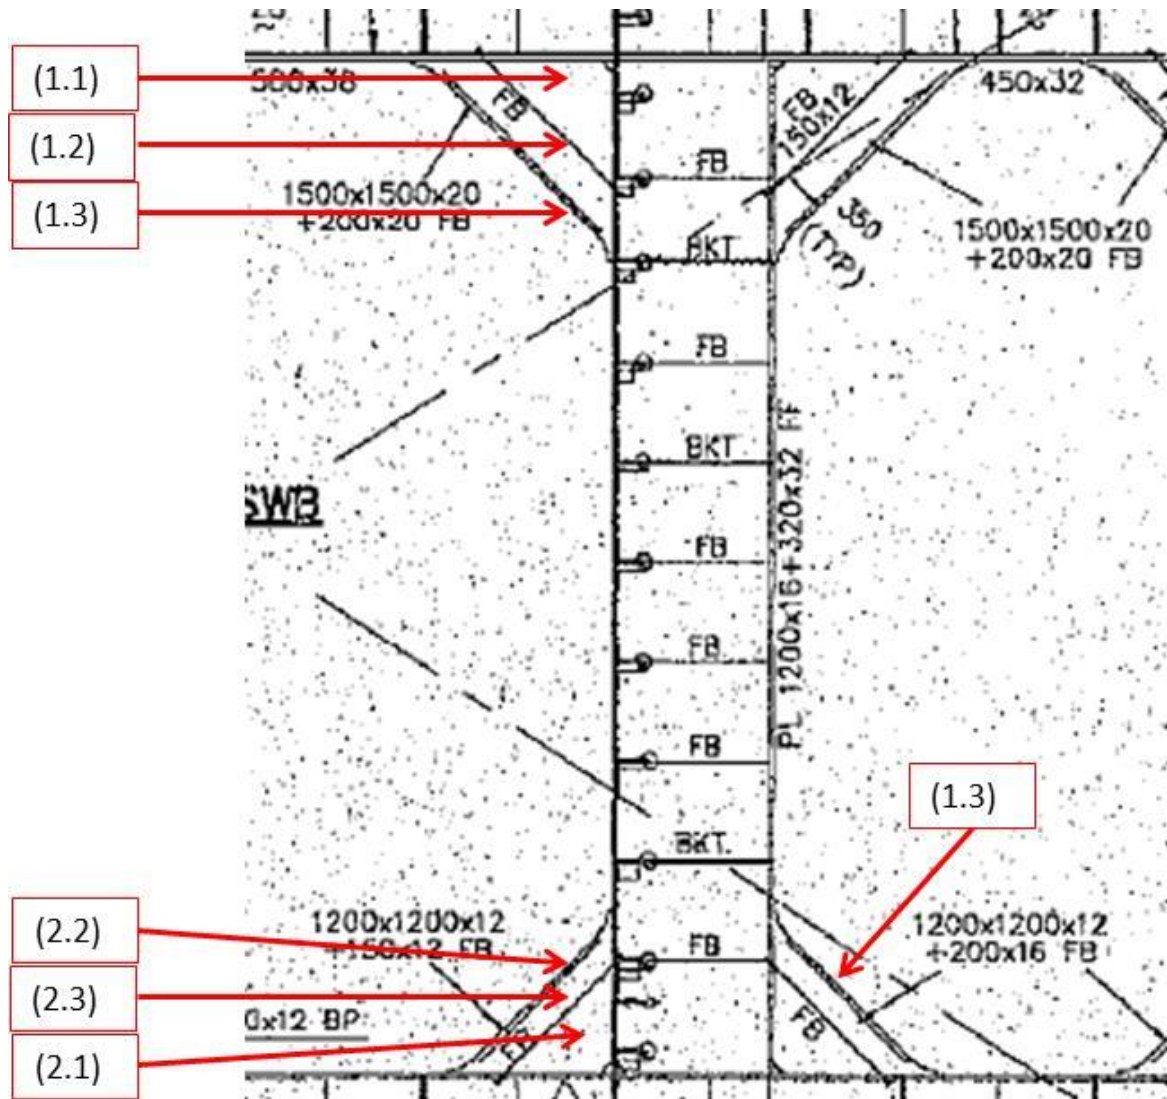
Brackets column beam (Column at 15000 [mm] of center line of the H-541)
